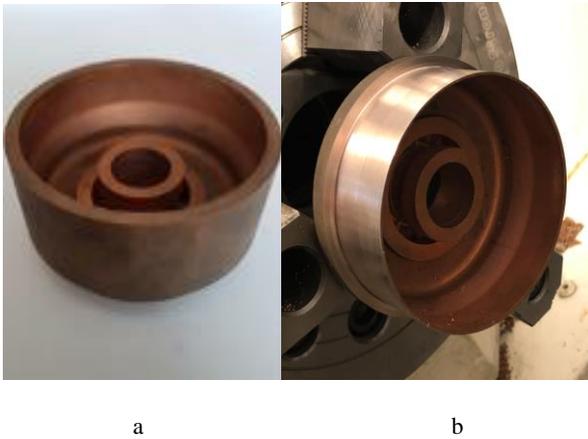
a – Fe–C–Cu PM part to be machined; b – machined Fe–C–Cu PM part in the chuck of the lathe
